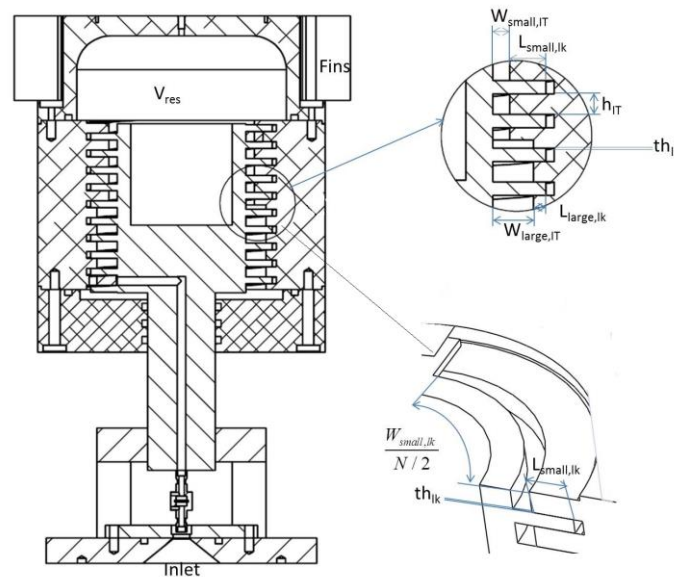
Schematic of the adjustable threaded inertance tube (4.5 turns)
